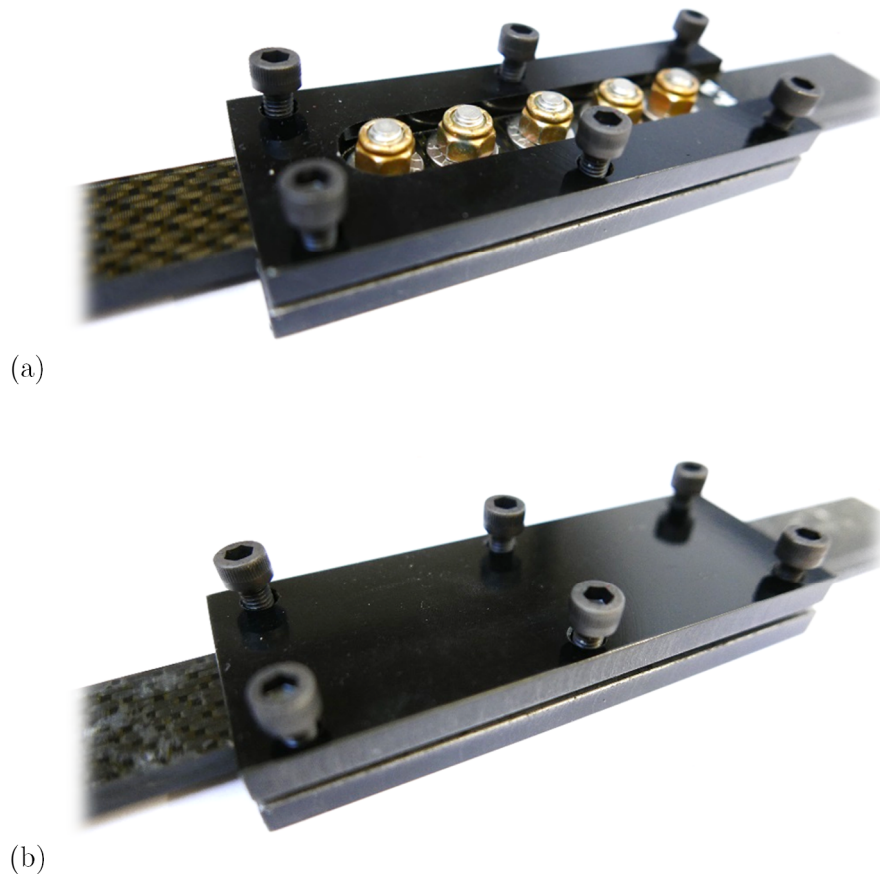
Guide plate system used to suppress out of plane bending; (a) hybrid specimen; (b) bonded specimens containing guide without slot for bolts
